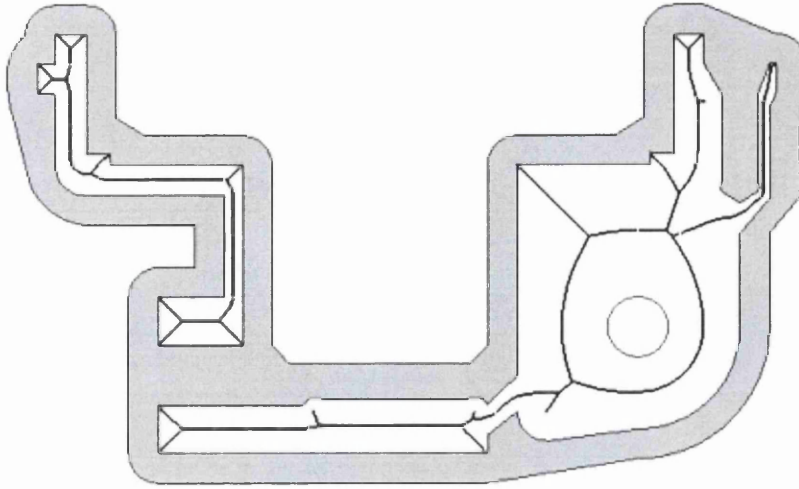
Model setup for test piece 2 showing the mould-cast assembly and its medial-axes
